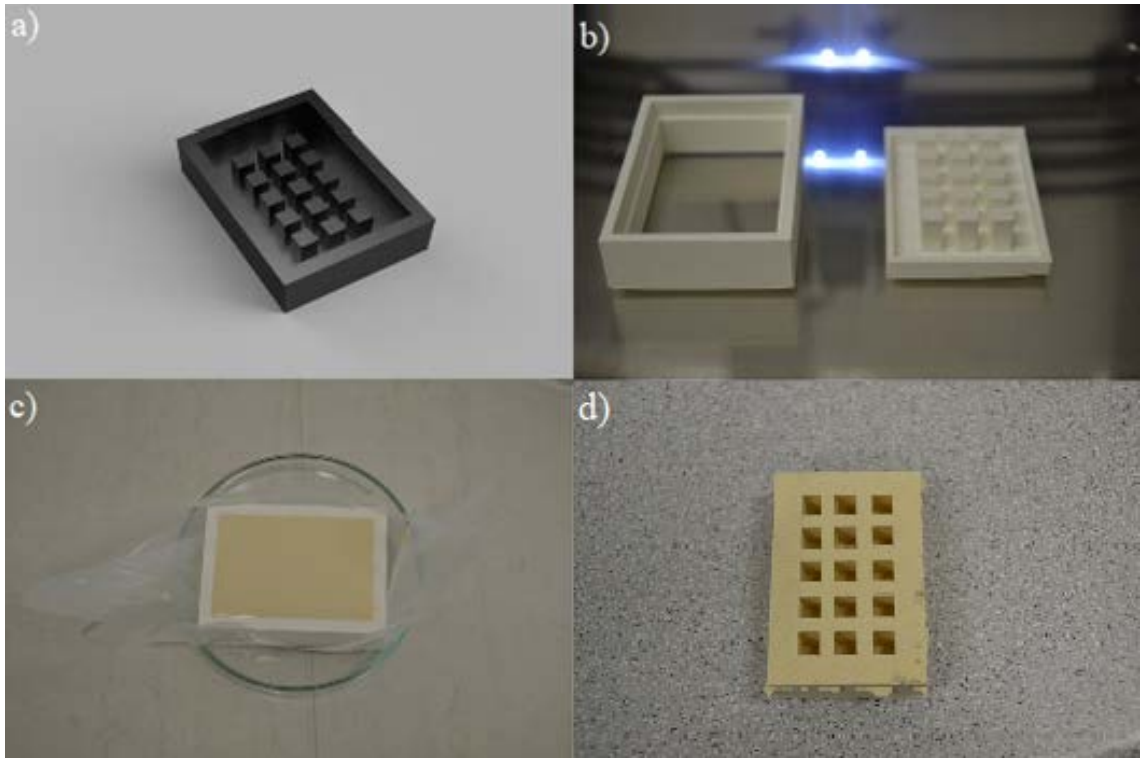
Mold for non-porous 6x6x12 mm rectangular samples: a) 3D design of the mold; b) 3D printed PLA positive of a mold; c) mold casted with silicone; d) final silicone mold
